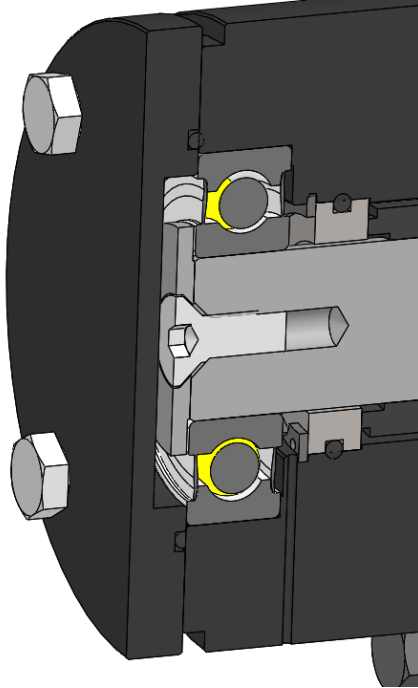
the shaft shall be installed front flush to the external bearing face (orange line)
